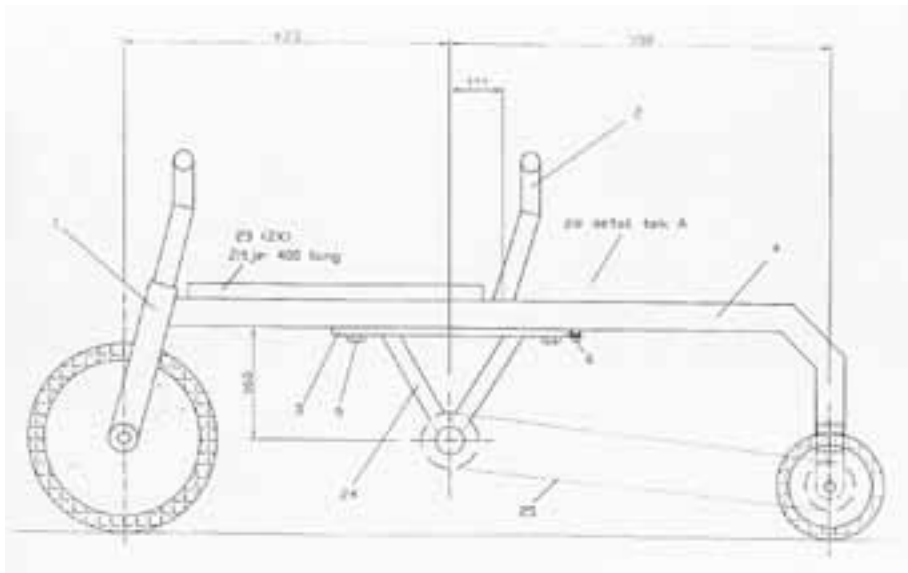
Technical drawing of students' design drawn by the teacher.
